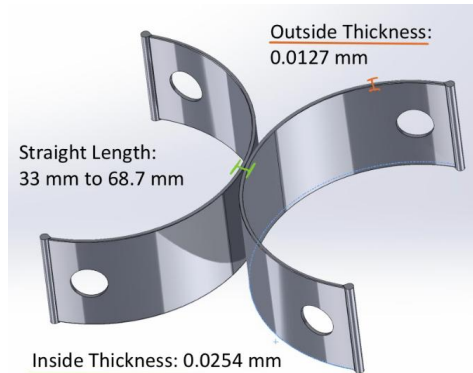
Butterfly Design Solidworks 3D Model. This design consists of two sectional matrix bands conjoined together in the middle to produce a band that slightly resembles a butterfly. Holes in the band will help to aid the removal of the device. Outside thickness of 0.0127 mm, inside thickness of 0.0254 mm, and straight length (when the curve of the band is bent straight) of 33 mm to 68.7 mm.
